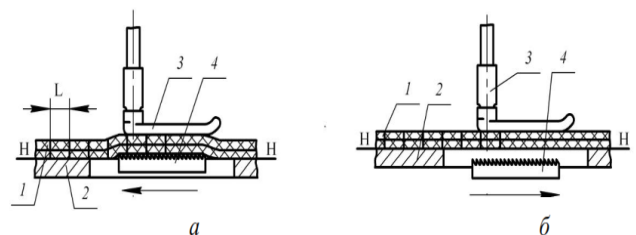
Material handling with a toothed rack: a - running gear, б - idle gear
